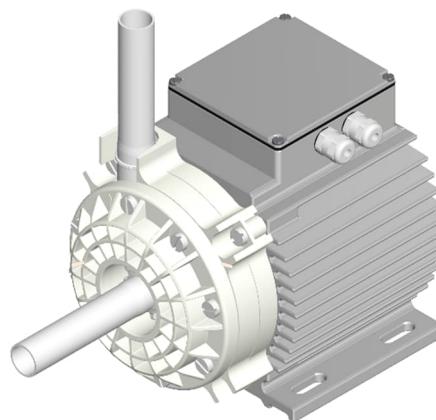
MagLev motor with sealless (welded) "Hybrid" pump head
